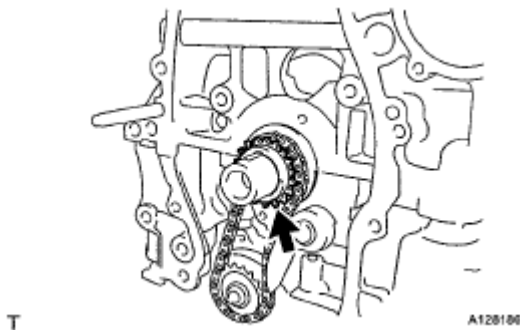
Identifying Crankshaft Timing Gear Or Sprocket
